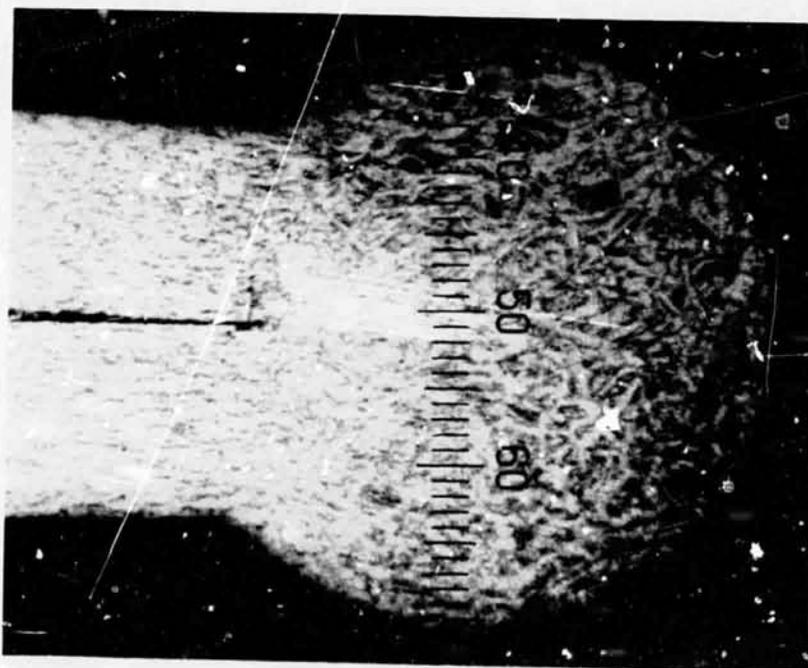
Photomicrograph Showing a Fatigue Crack Starting at the Crotch of the Weld Bead. Note Uniformity in Plate Thickness and Weld Bead (Each Increment Equals 0.00023 Inches)
